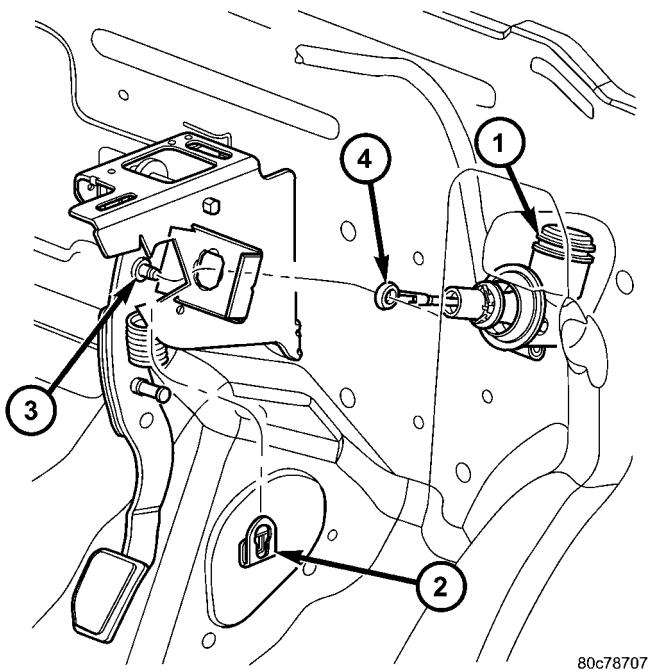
Clutch Master Cylinder at Pedal Bracket
